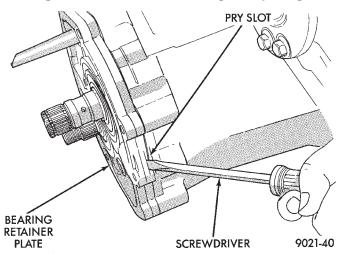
Pry Bearing Retainer Plate to Remove CAUTION: Pry only at slot as shown (Fig. 30).
